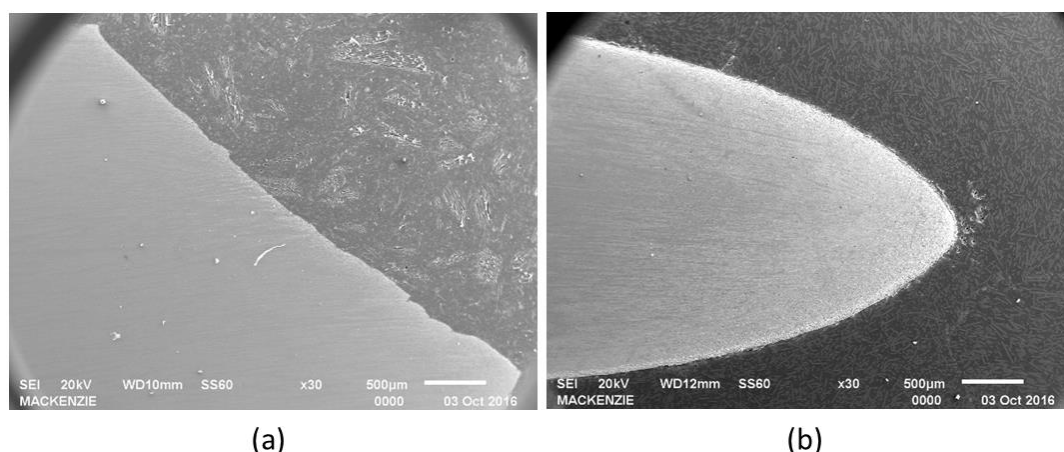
Micrographs of the longitudinal sections of tensile fracture for the Inconel 625 specimens tested at (a) 500 and (b) 800 °C.
